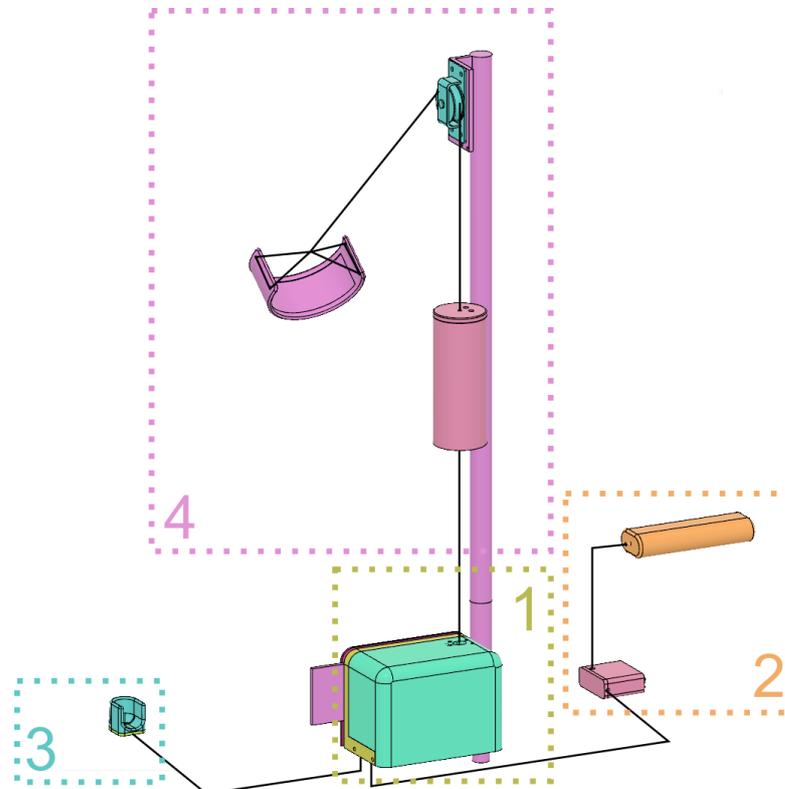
Basic Set-up consisting of four sub-assemblies: 1) Actuator box assembly, 2) power supply assembly 3) control interface assembly, 4) pole assembly
